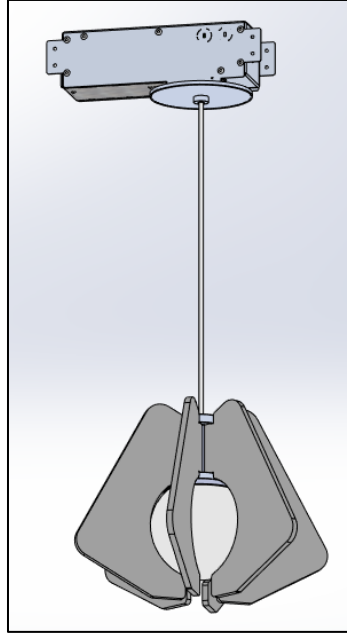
COMPLETED INSTALLATION OF ATLA PENDANT
